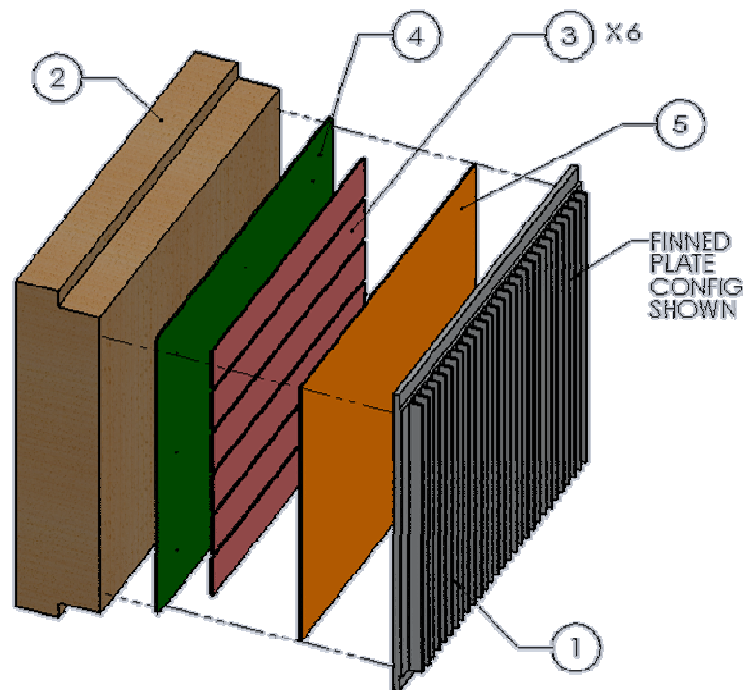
Insulated half of an AECM module. (Drawing T300) The machined fin plate concept is shown.
